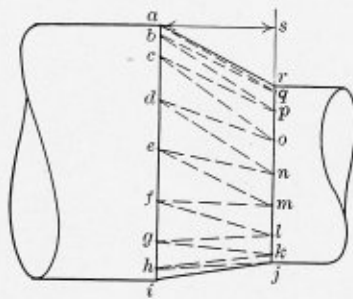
PATTERN LAYOUT FOR SLOPE SHEET
